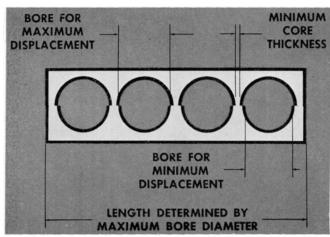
Determining basic dimensions of engine from cylinder bore size
